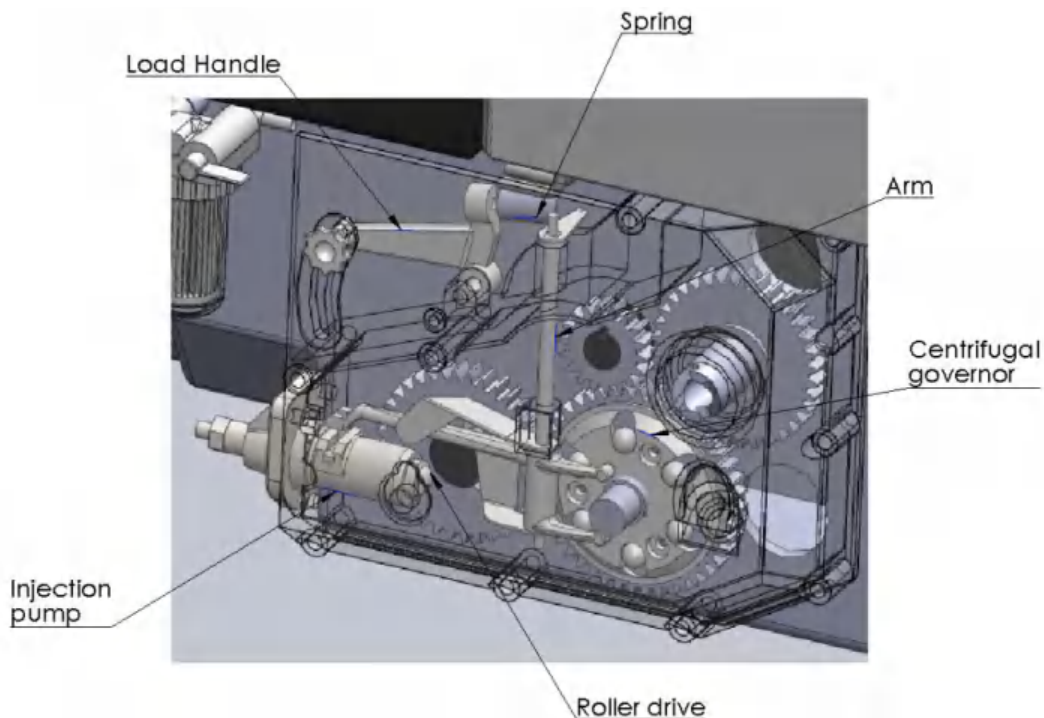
Drawing of the governor subsystem and synchronizer gears.
